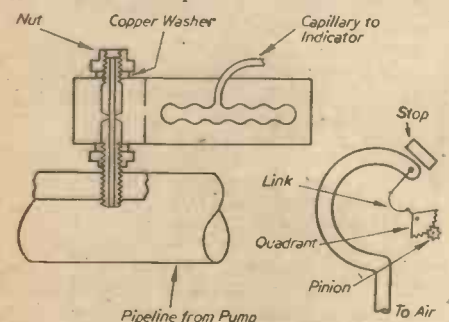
Banjo union to a transmitting type pressure gauge.
